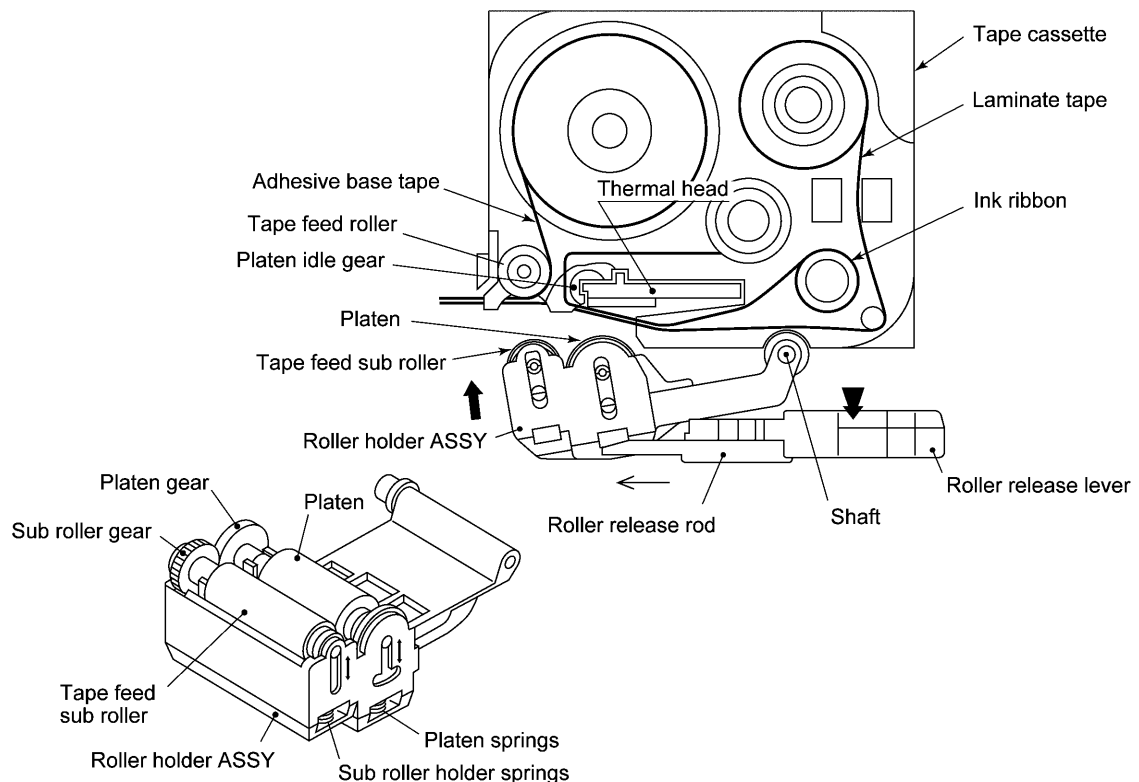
Roller Holder ASSY Setting & Retracting Mechanism
